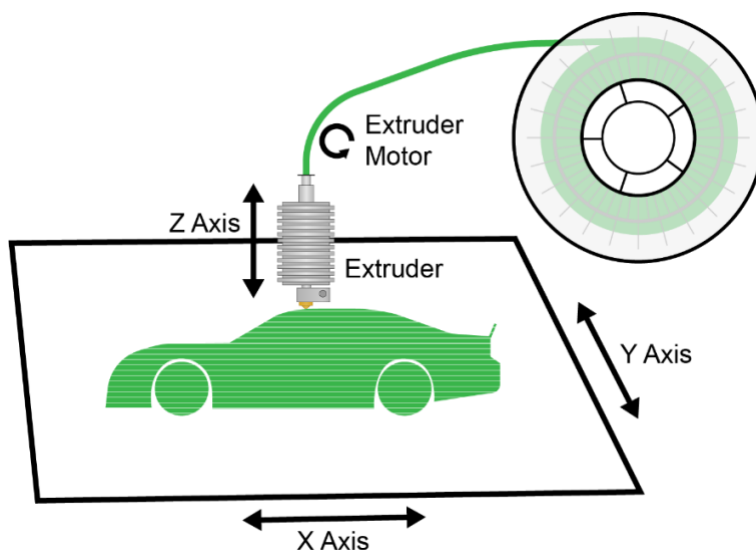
FDM 3D printer consisting of motors to move the extruder in three dimensions (x , y , z) and a fourth motor to feed plastic into the hot extruder. The motors move the extruder in two dimensions to trace out a single layer and then the z axis moves up a small amount to begin the next layer.
